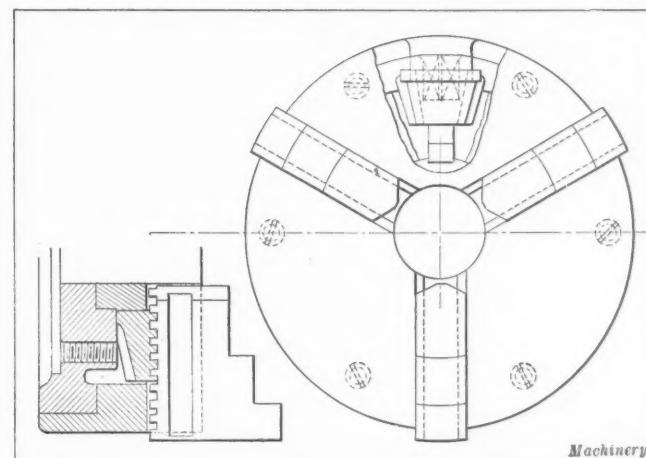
Horton Universal Chuck with Large Wrench Socket in Pinions
